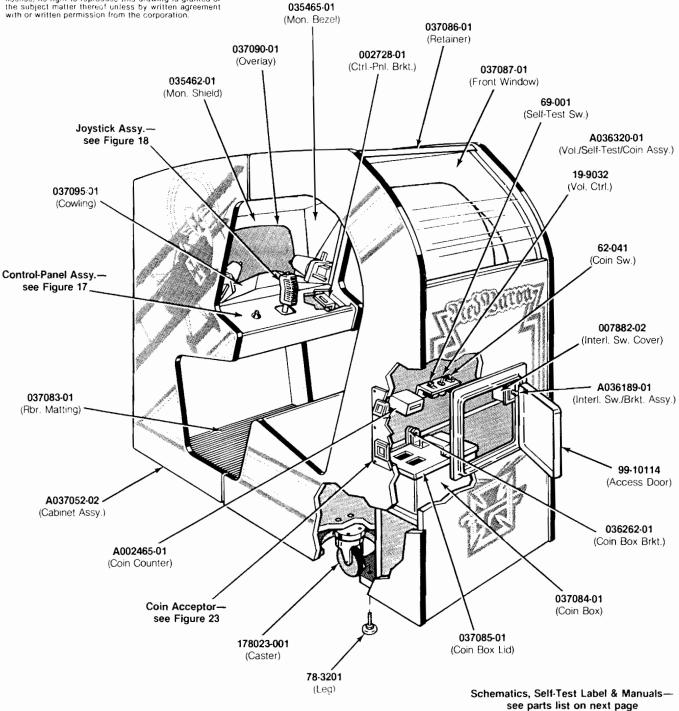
Cabinet-Mounted Assemblies A037051-xx B
